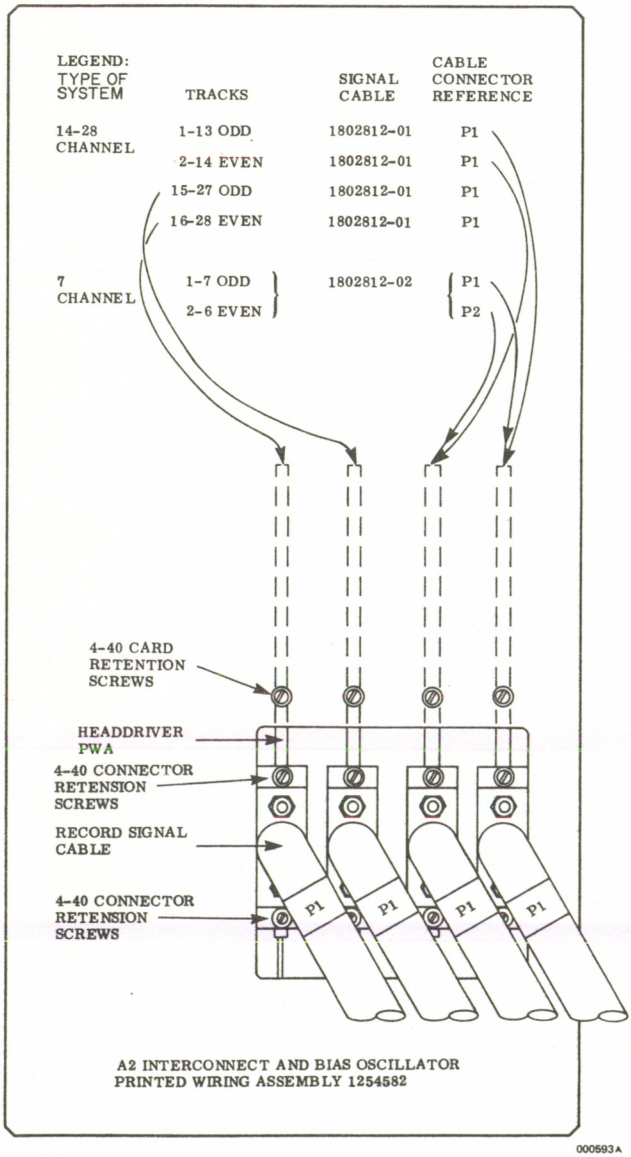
Headdriver Housing Mother PWA -Showing PWA and Cable Connector Securing Screws
